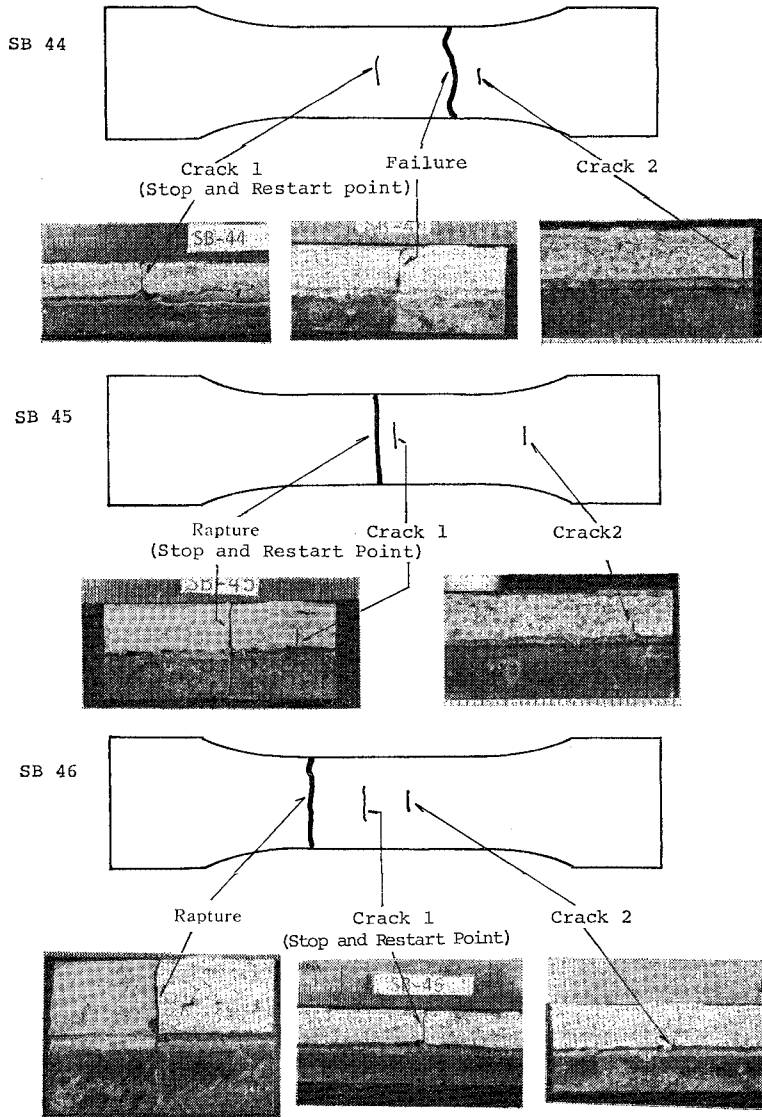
Configuration of Weld Metal at Root and Fatigue Crack.
